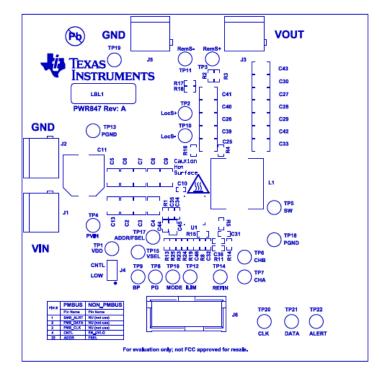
PWR-847EVM Top Layer Assembly Drawing (Top View)
